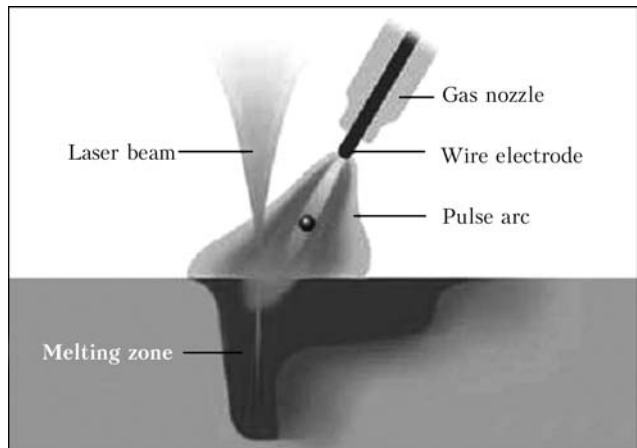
Laser-arc hybrid welding (high process stability, higher welding speed, good wetting of edges being welded, large weld volume, good metallurgy properties)
